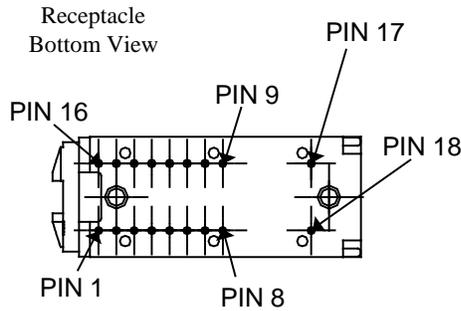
KC4210PCB-Mount Receptacle Orthographic Drawing
